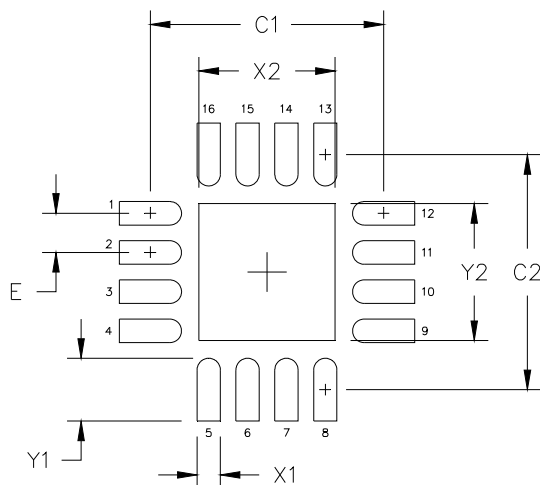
Si53306 3x3 mm 16-QFN Package Land Pattern
